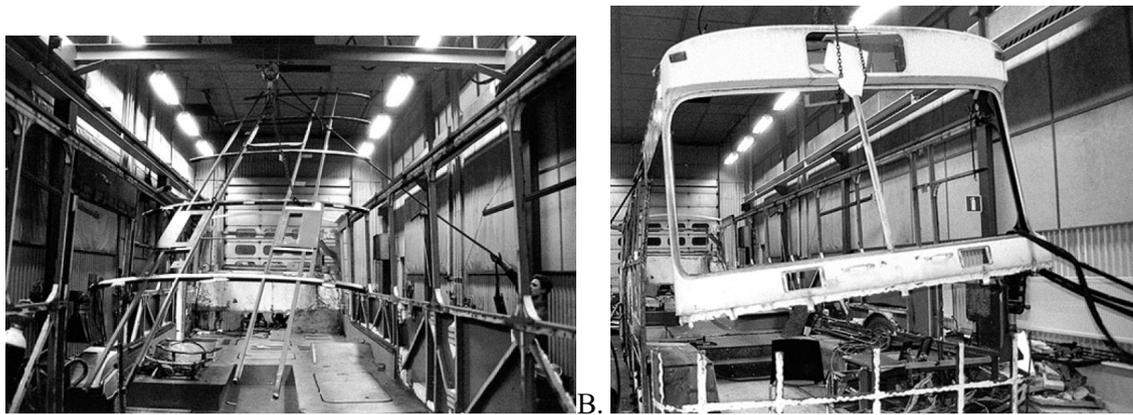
Removal of the roof; B – Removal of the front by cutting
